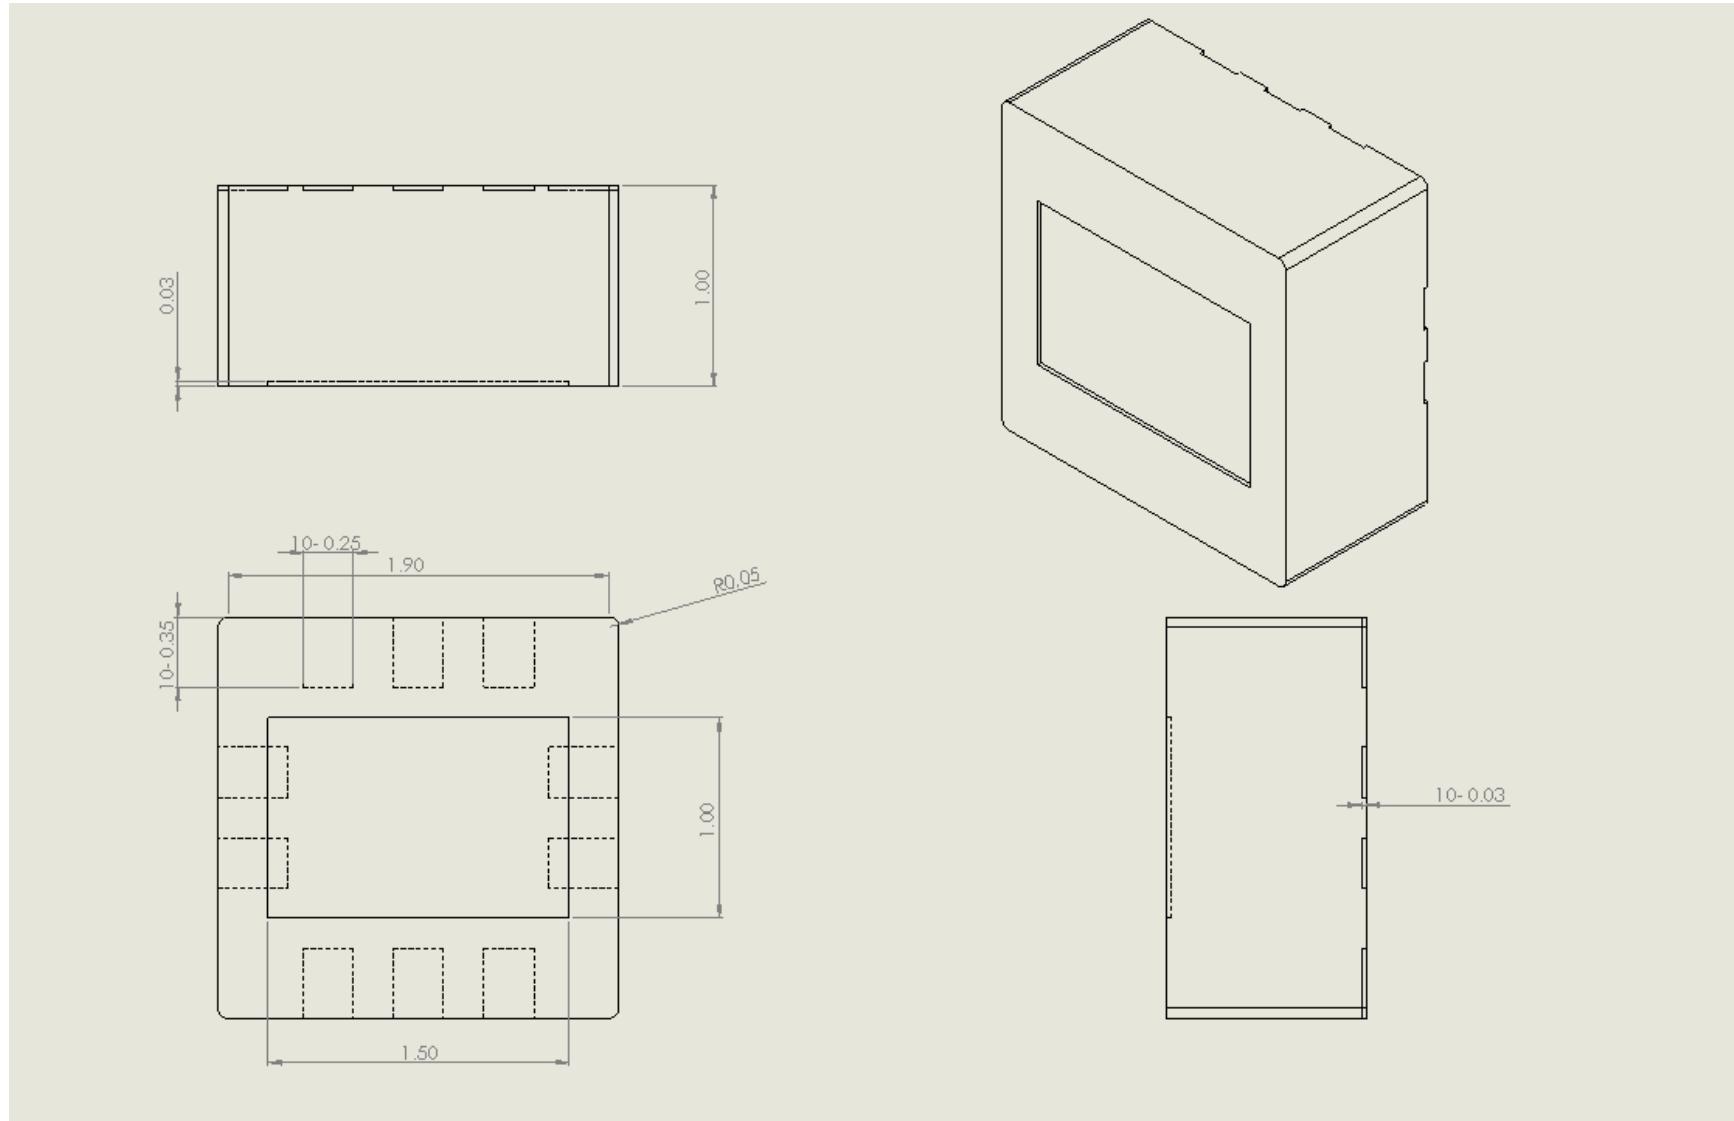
Part 1002 (3-Axis Digital Magnetometer IC) Part Drawing
